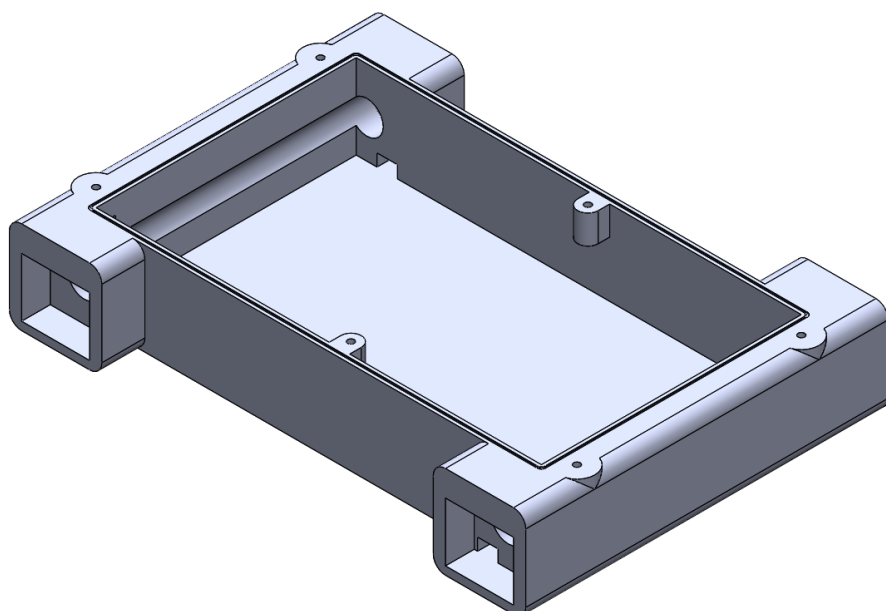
O-ring seal groove running the full perimeter of the robot body
